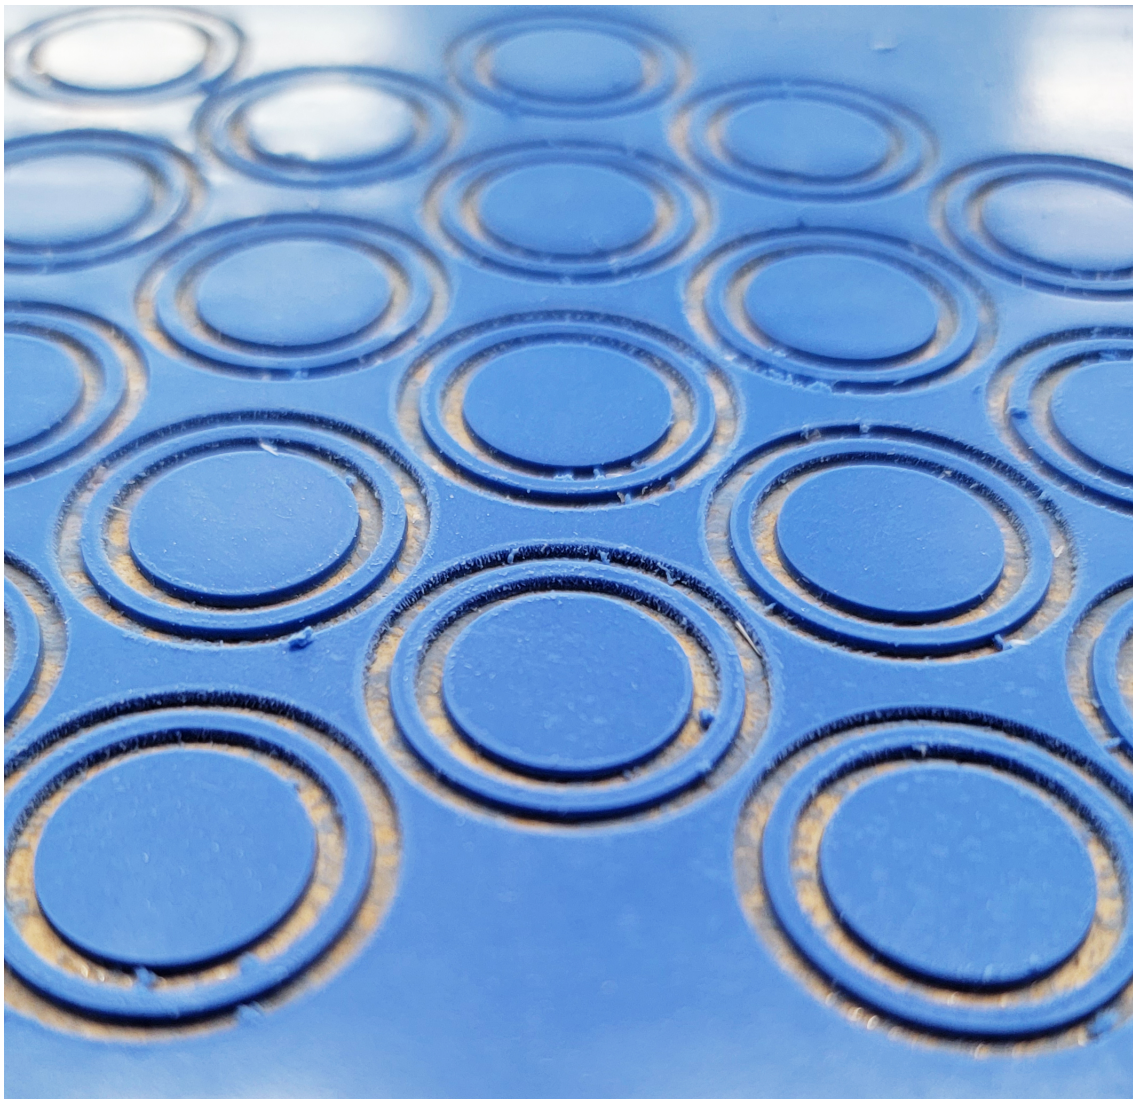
The finished product from CNC milling of a set of fluorosilicone gaskets Note the precise, smooth contours of the gaskets. Some debris is present, this can be easily removed using a rolling motion with a finger. This can also be removed using compressed air, though doing this manually is more laborious due to the small size of the gaskets. A tumbling or a liquid immersion method could also theoretically be used for part cleanup.
